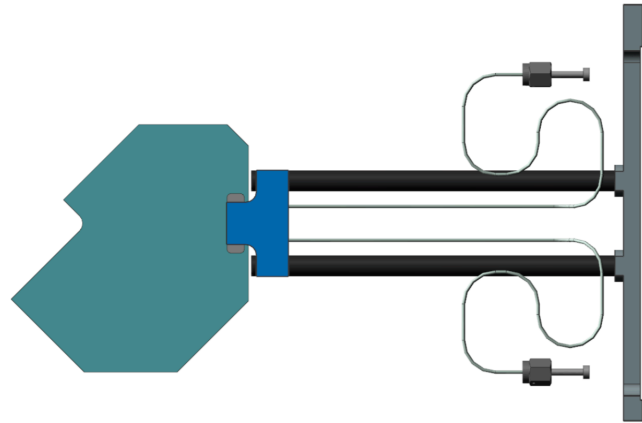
Module Mechanical Assembly. Observe the silicon substrate(teal), soldered to the fluidic connector which is glued to carbon mid-plate(blue), held by the two black carbon fibre legs which are connected to the module foot.
